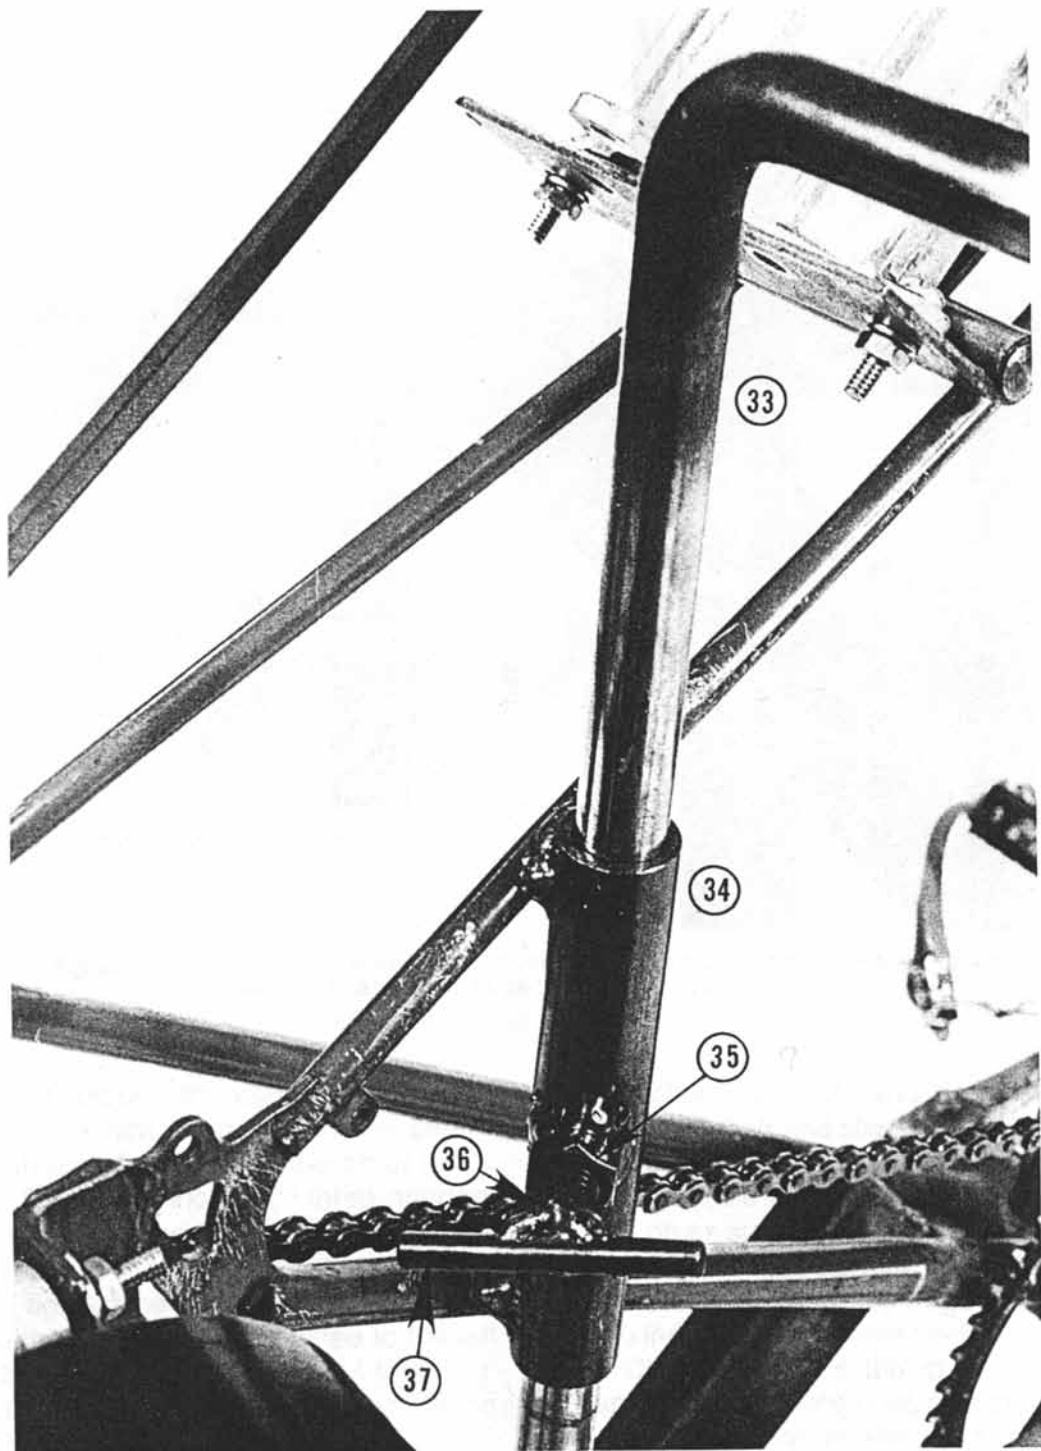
Basic frame with seat, power-head support, hinge for idler, table support tubing, and pedal crank
